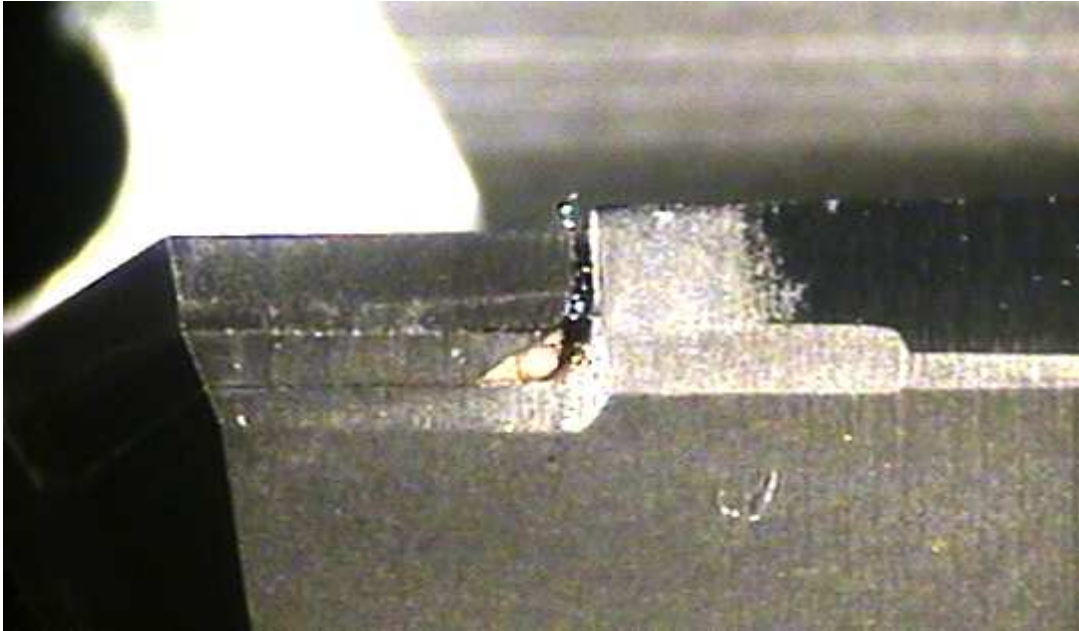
Inferior brazing with excessive gap between the PCD inserts and the carbide body. The edge of the body served as an additional cutting edge that cut microchips. Rubbing marks on the margin of the carbide body due to lack of backtaper and body clearance (the second PCD insert)
